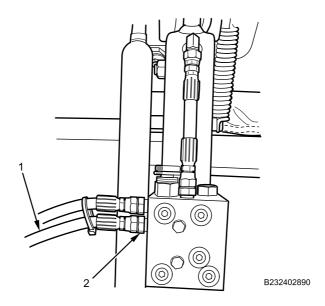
Hydraulic Power Module-to-Hydraulic Cylinder Hose Removal.
